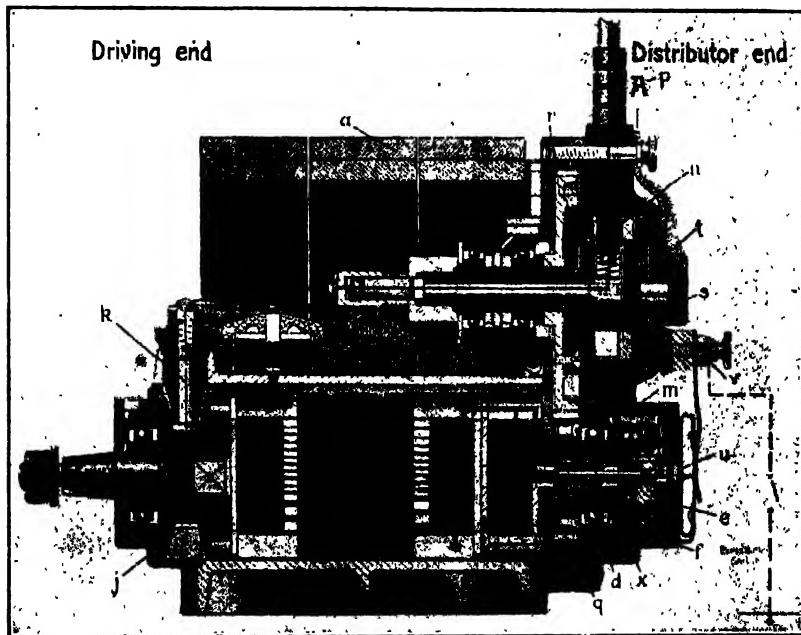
Sectional View of Bosch High Tension Magneto.
